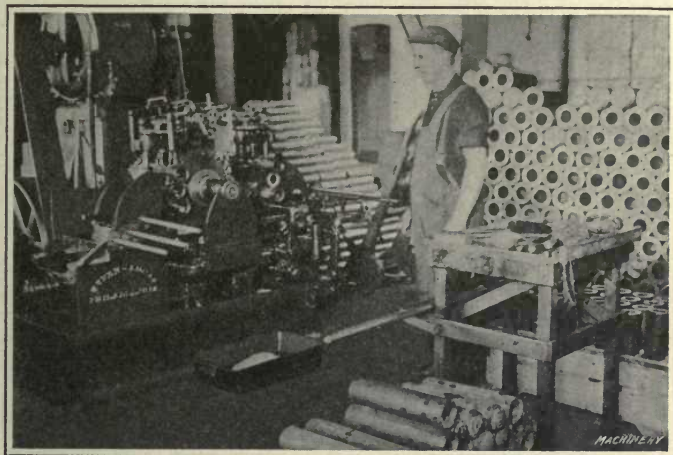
Cutting off Excess Stock from Open and Closed Ends of Forging
